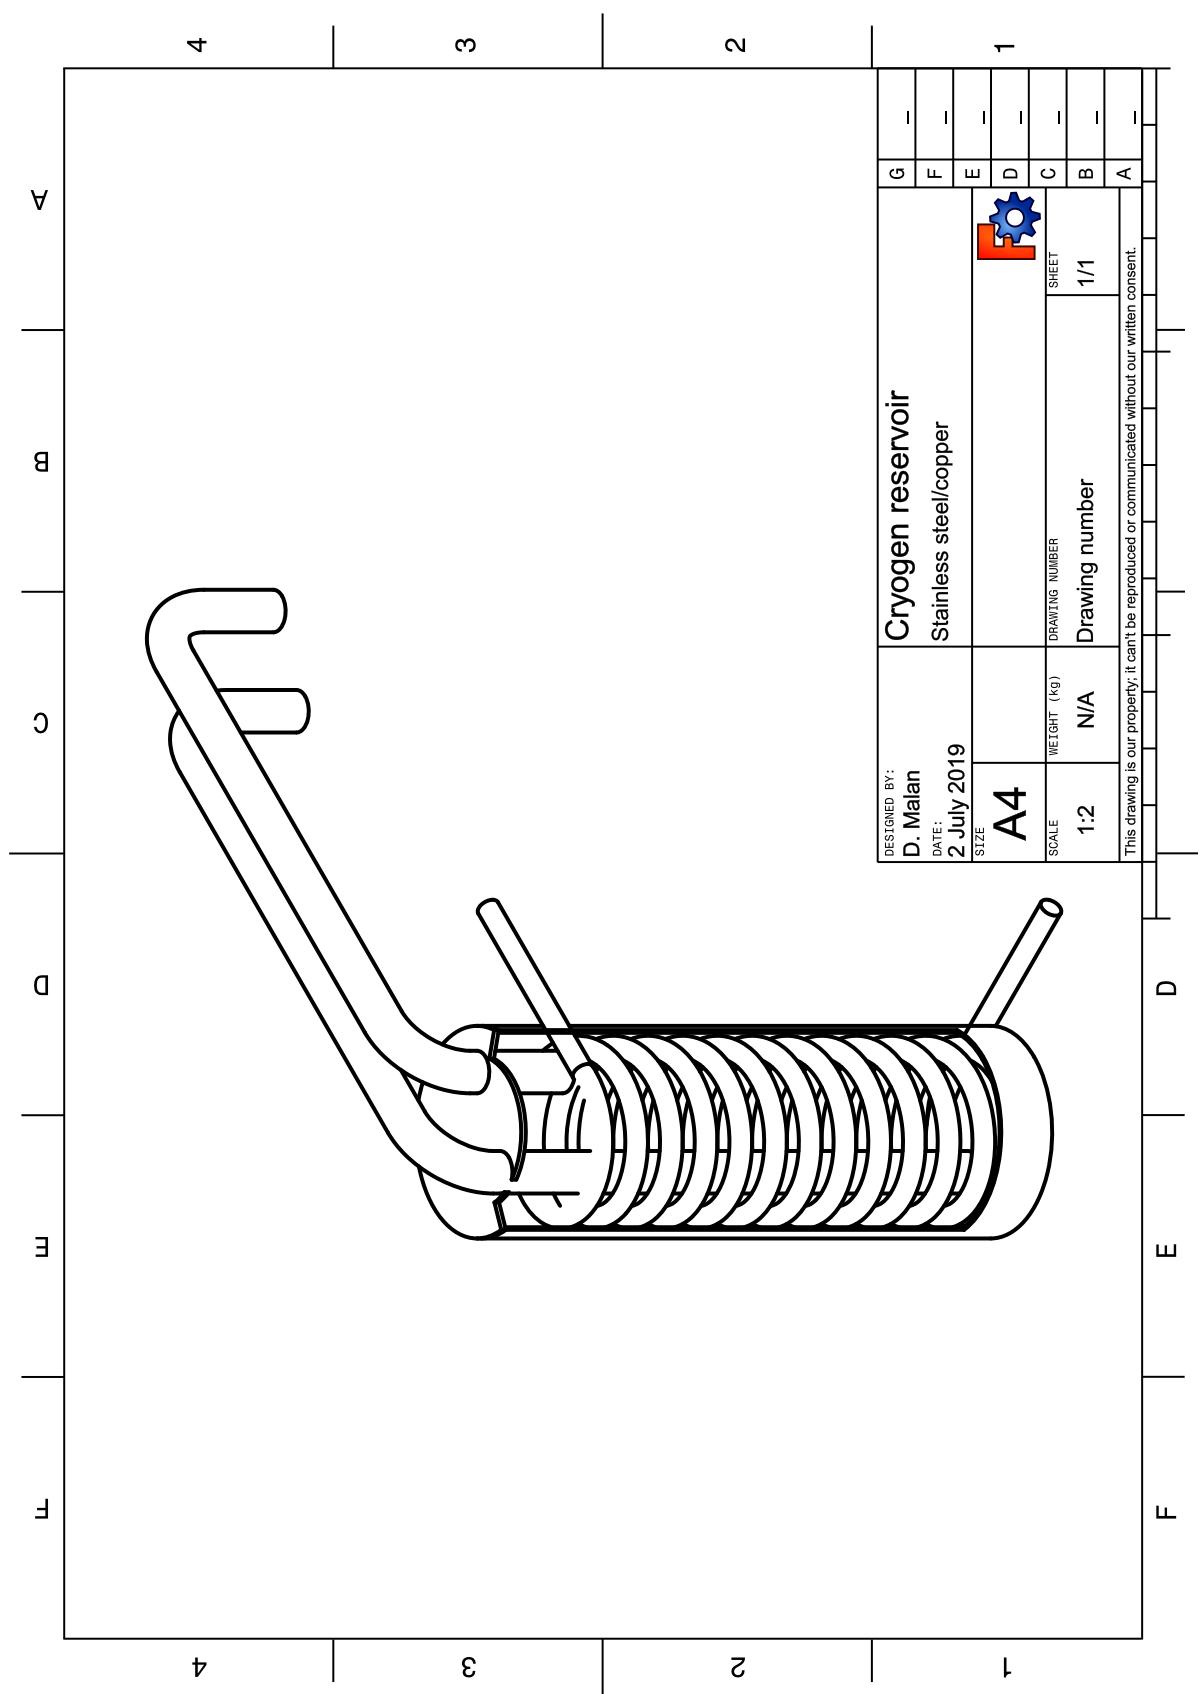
Cut-away technical drawing of coolant reservoir.
